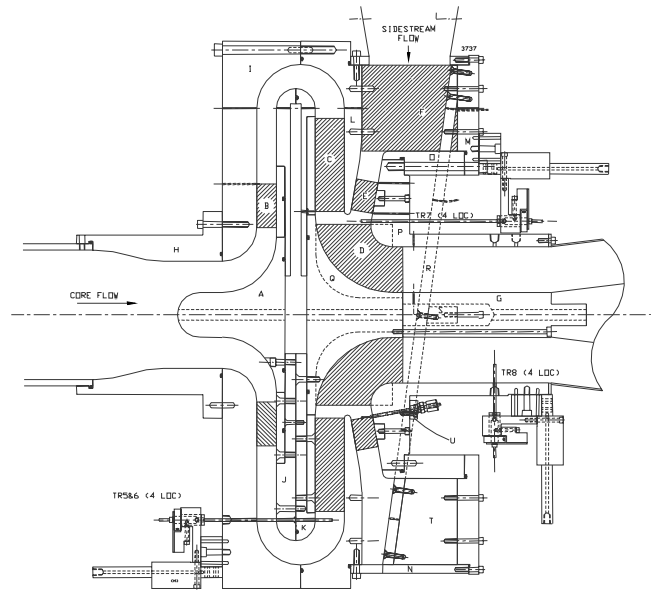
Sidestream Test Rig Assembly Drawing, Modified Build.
